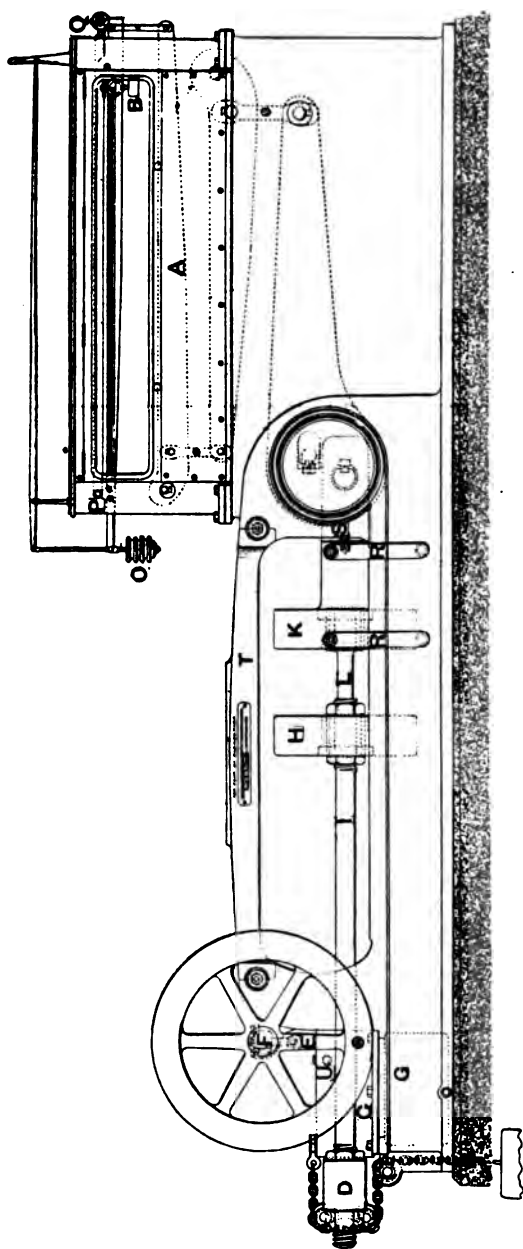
MESSRS. ADAMSON'S HIGH POWER 100-TON HORIZONTAL TESTING MACHINE.
